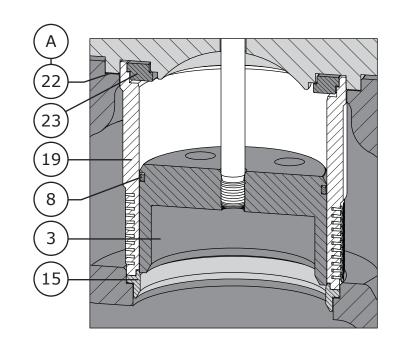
Load Ring Diagram (8 Inch Valve Assembly)
